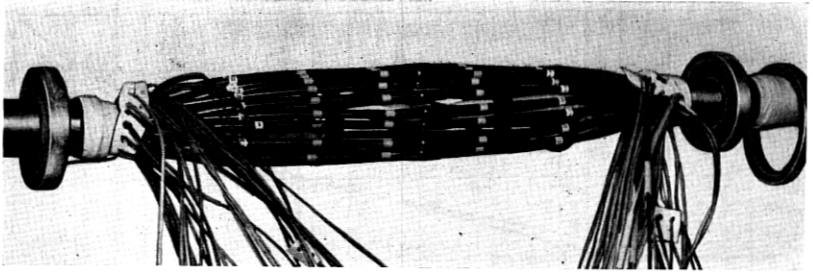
Basket formed of spliced coaxials. A steel sleeve is placed over the splice and solder wiped to lead sheath through lead disks and rings.
